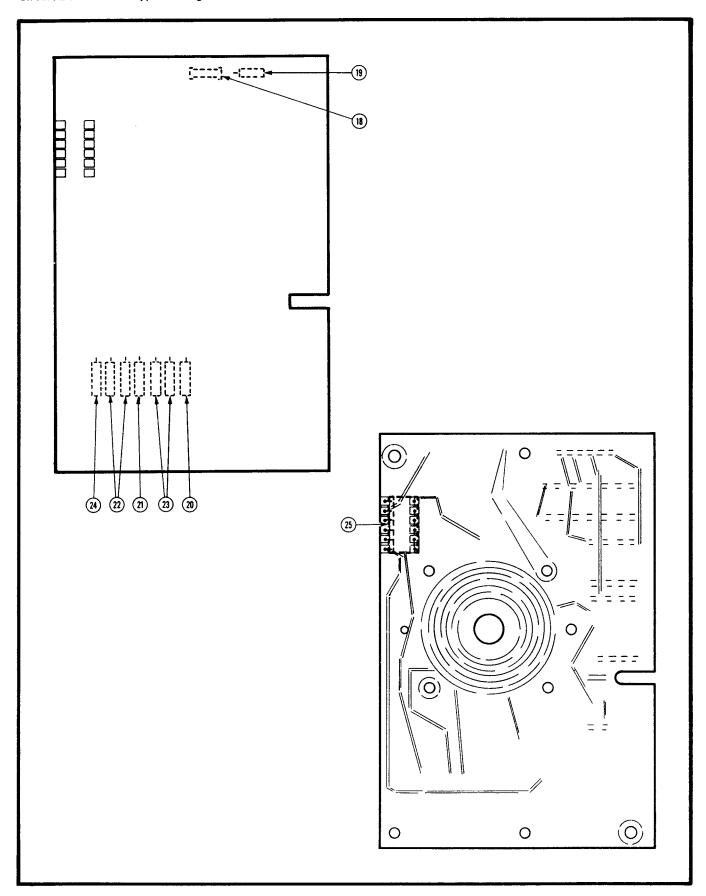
Circuit Board Assembly, B-Timing (Sheet 2 of 2).
